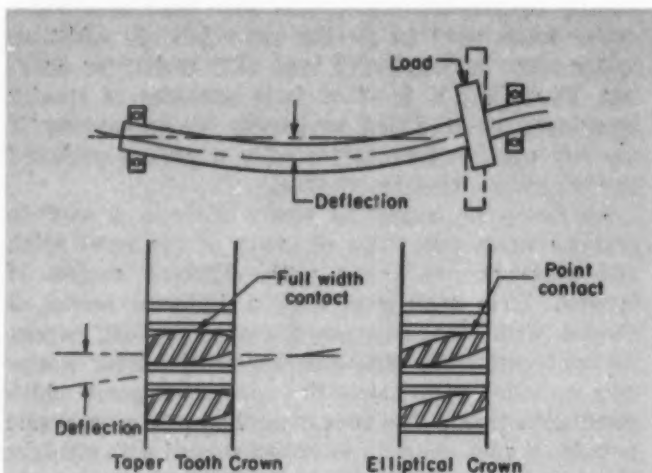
Above—Different end-bearing conditions call for different types of gear tooth relief. Shown here is a shaft deflection condition which can be compensated for by a combined tapered (left) and elliptical (right) crown. Use of a plain elliptical crown, alone, in this application would tend to weaken the gears
